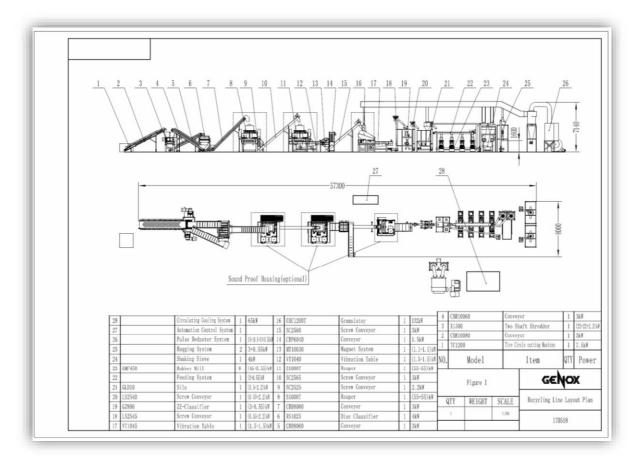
Tyre recycling plant process layout (provided by LUP).
